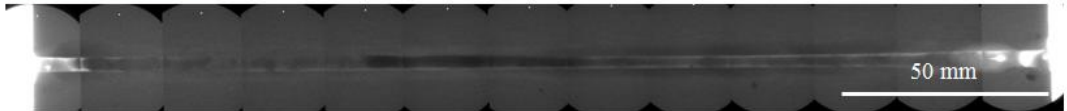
RT result of weld bead having 3mm gap and no defect - 2
